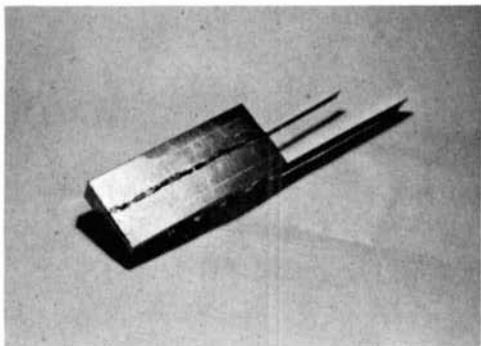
Solder the resistor leads and edges of the center copper strip to the U-shaped copper box.
